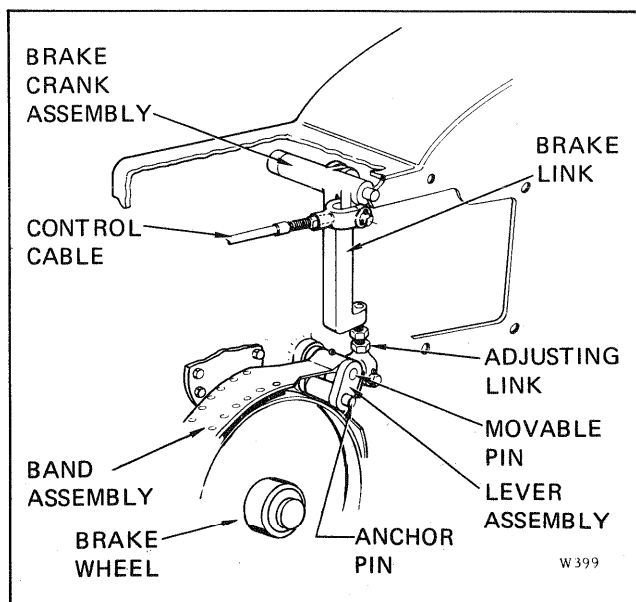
DIRECT DRIVE DRY BRAKE ASSEMBLY
